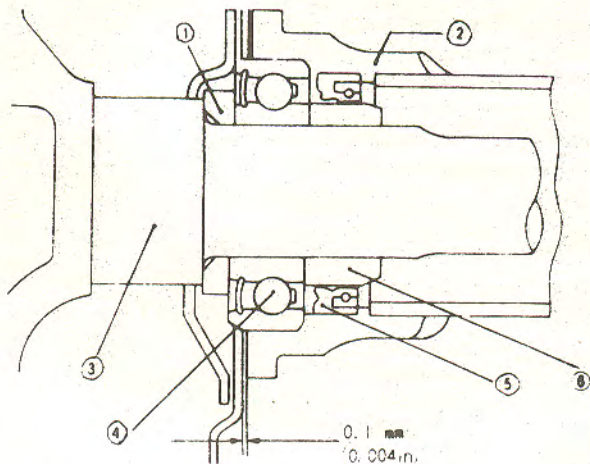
Checking the clearance between the brake back plate and the rear axle housing.
